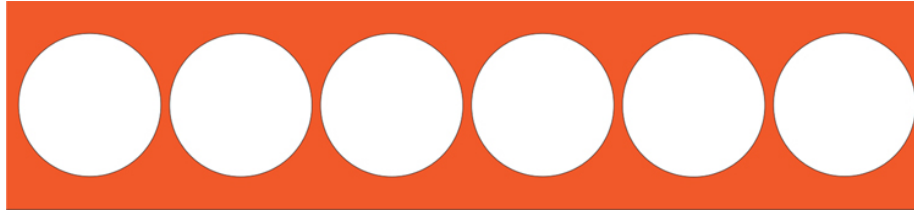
Cutting several parts from one sheet of material can help reduce waste.
